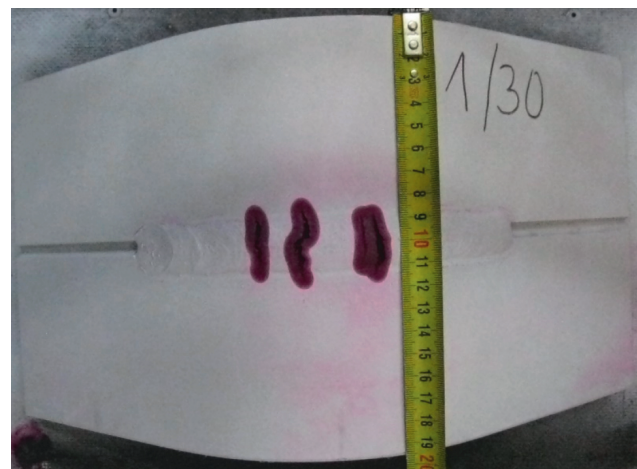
Crack-triggered penetrant test indications in the 40 mm thick specimen subjected to the bend test
